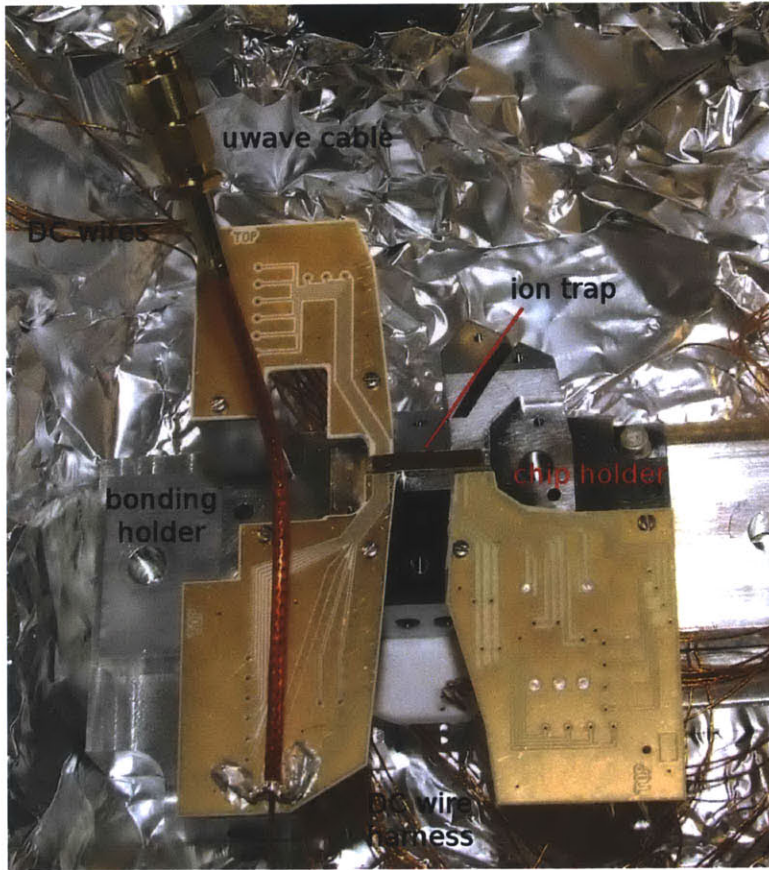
Trap assembly prior to wirebonding: the trap is epoxied to the chip holder which is then lowered into the prepared PCB assembly. To match the wire-bonder's expected workpiece height, two additional shim blocks are used.
